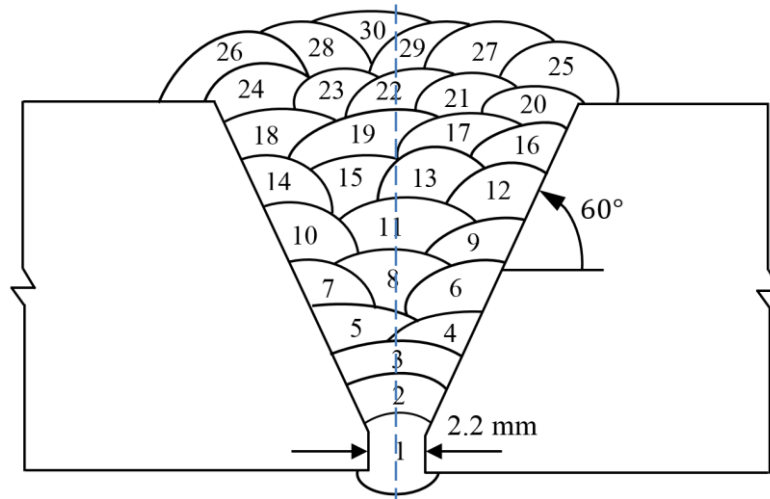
Weld deposition sequence in specimen with SMAW process
